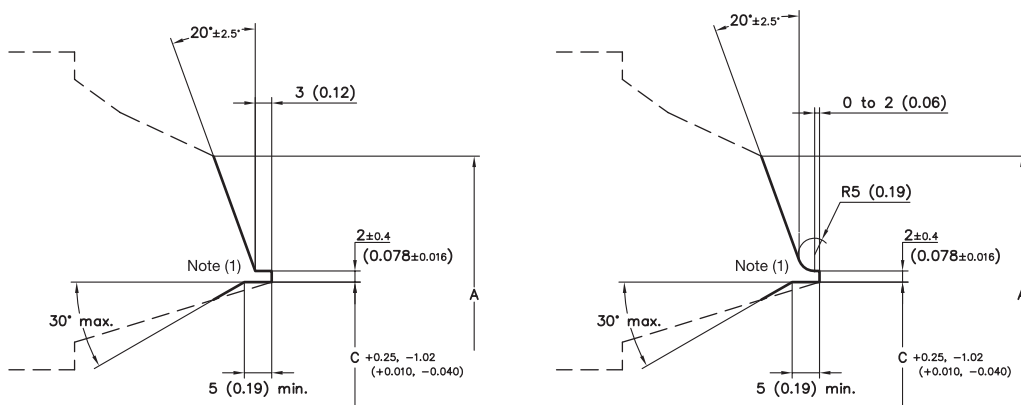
Weld Bevel Details for GTAW Root Pass
